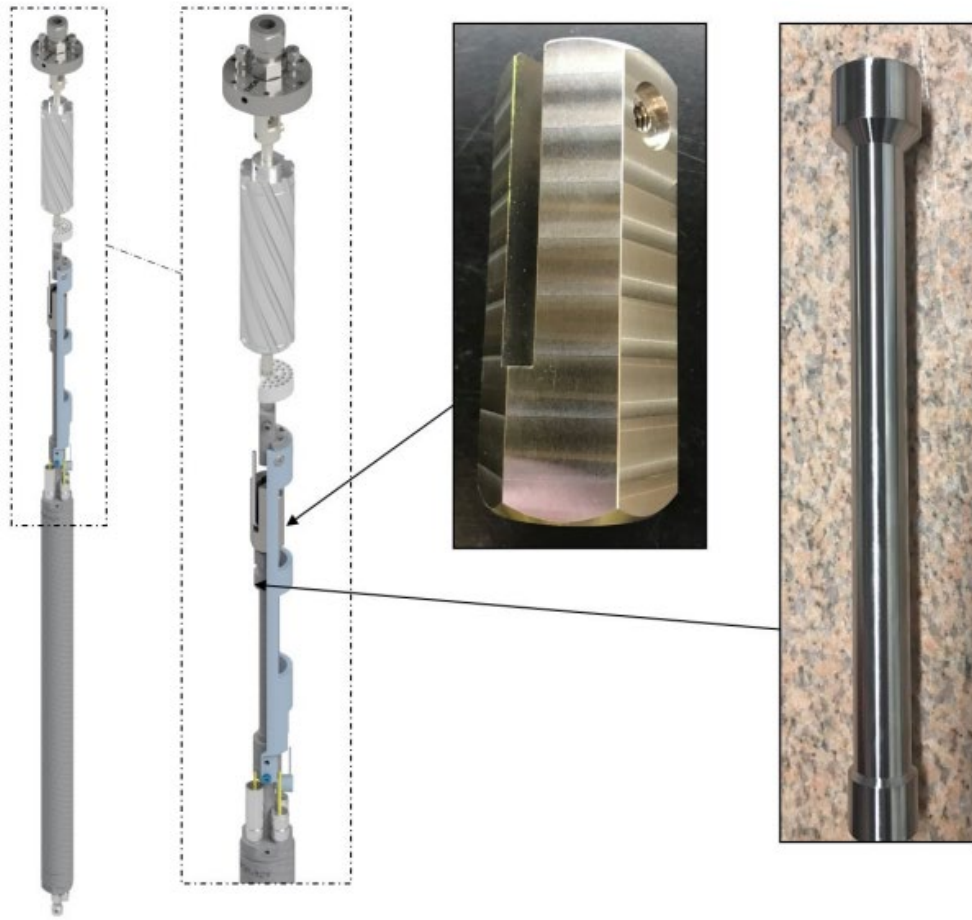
Fabrication well extension and compression seal fitting and pictorial description in the THOR assembly.
